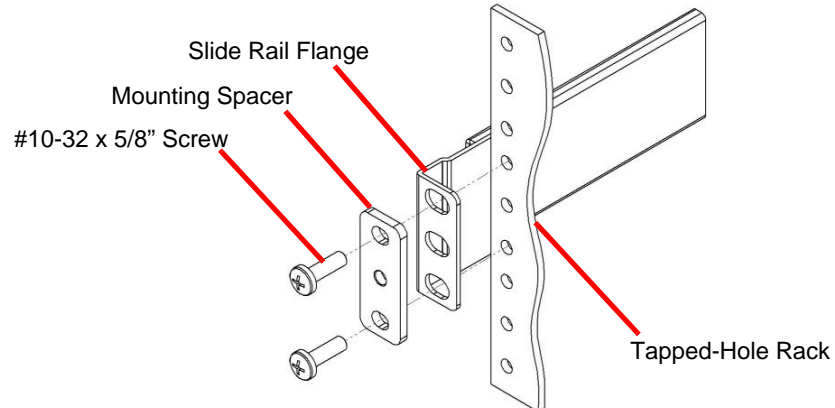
46. Attaching the Slide Rail to a Tapped-Hole Rack
